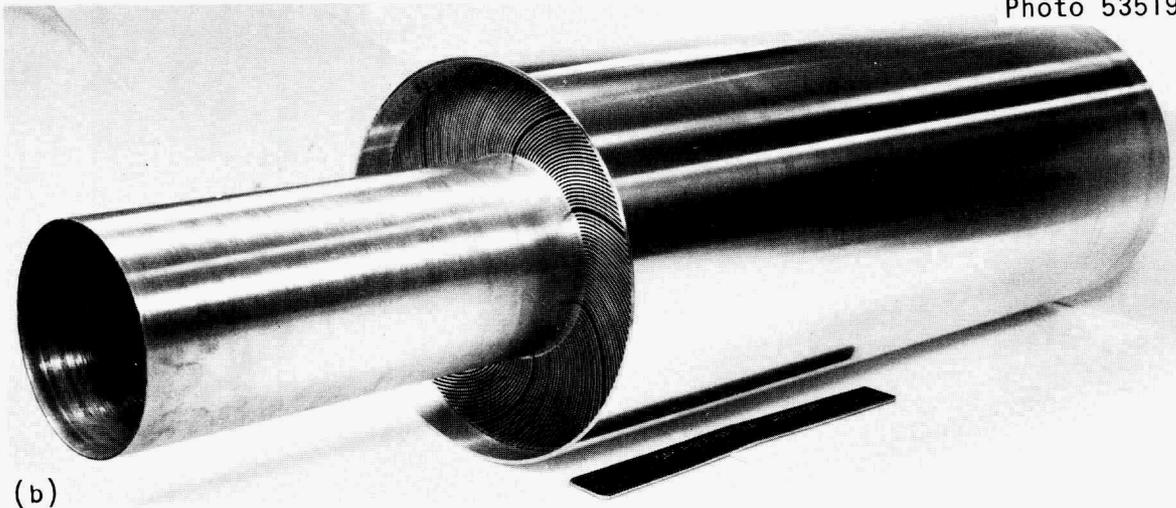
Overall View of Completely Welded Inner Annulus.
